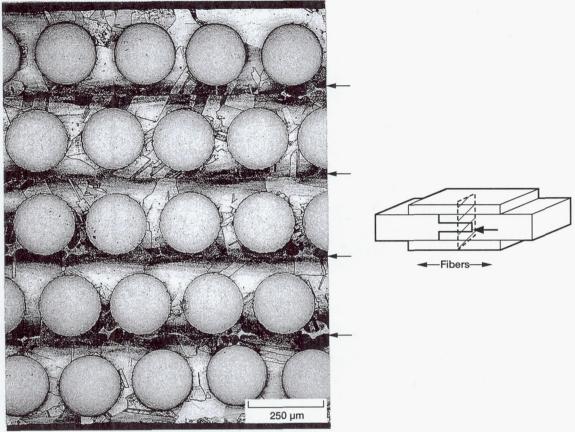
Transverse section of panel E. Diffusion-brazed tongue-in-groove butt joint. Three-ply base material with single-ply doublers and 25-μm, 72 Ag-28 Cu filler metal. Arrows indicate brazed joints. Etched.
